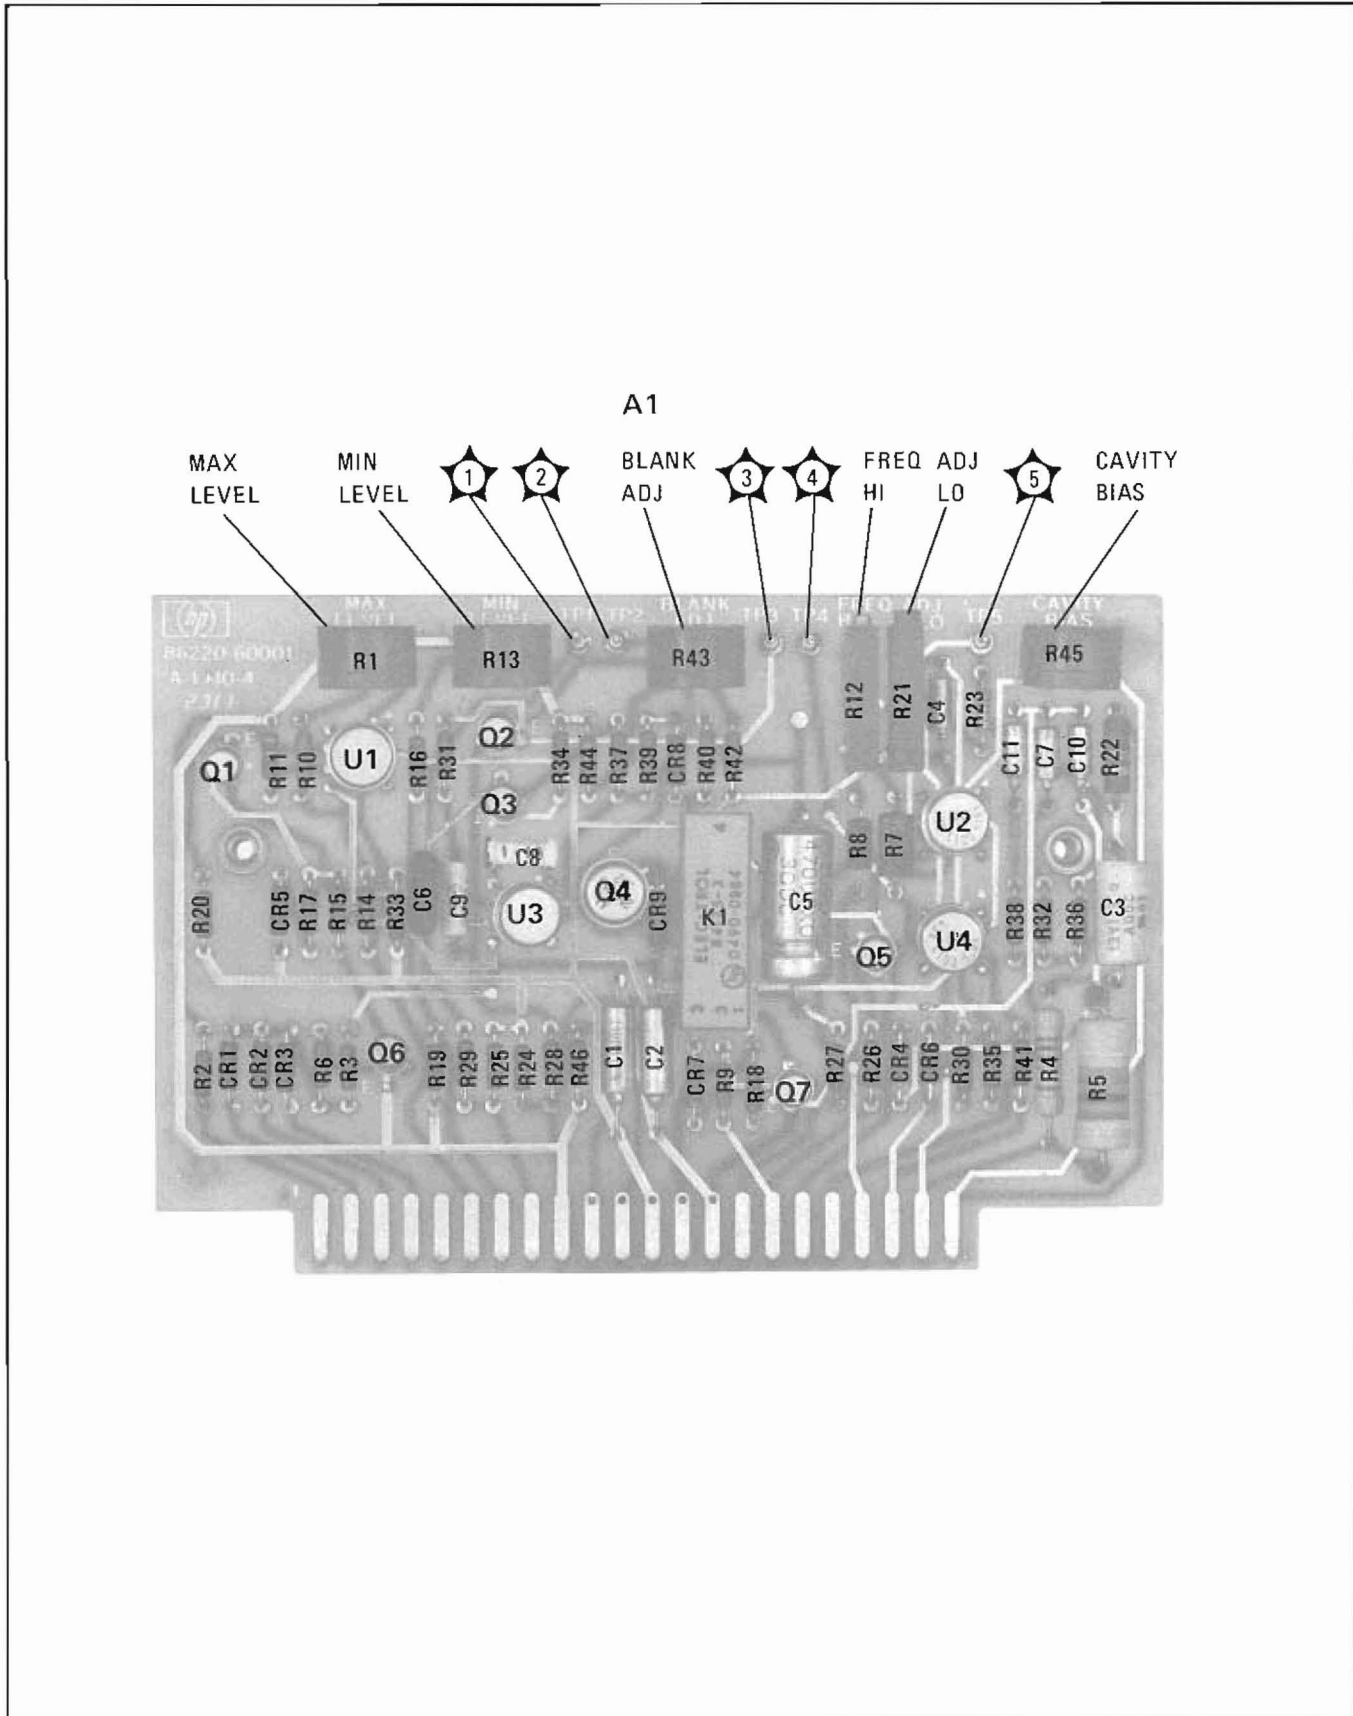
Replacement for Figure 8-7. A1 YIG Driver/ALC Board, Component Locations (CHANGE A)
